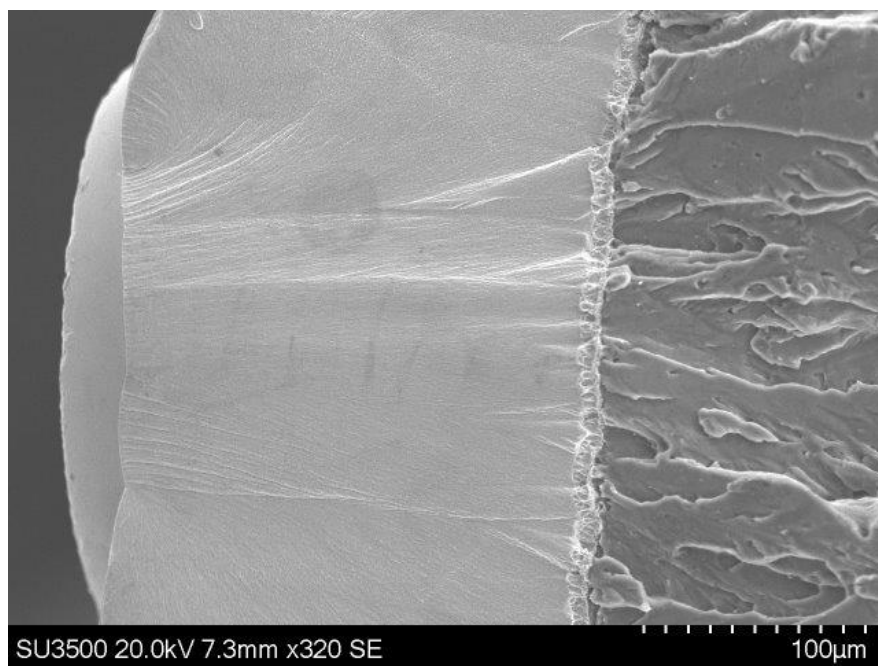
Detail view of nodule and coating near location I on fracture surface of specimen H13.
